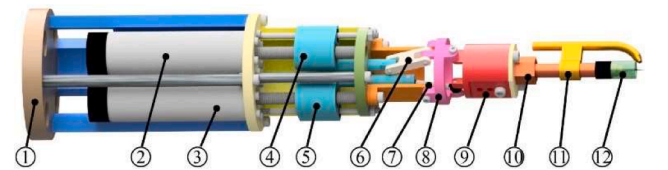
Detailed description of the mini manipulator which manipulates the welding torch to achieve 2-DoF movement in confined environments. ① connector for adapting to the macro manipulator (e.g., UR, KUKA, ABB, etc.); ② LSC motor; ③ USC motor; ④ LSC slider; ⑤ USC slider; ⑥ LSC connecting link rod; ⑦ USC connecting link rod; ⑧ LSC rotational crank; ⑨ USC rotational crank (torch holder); ⑩ welding torch; ⑪ wire feeder; ⑫ torch head.
